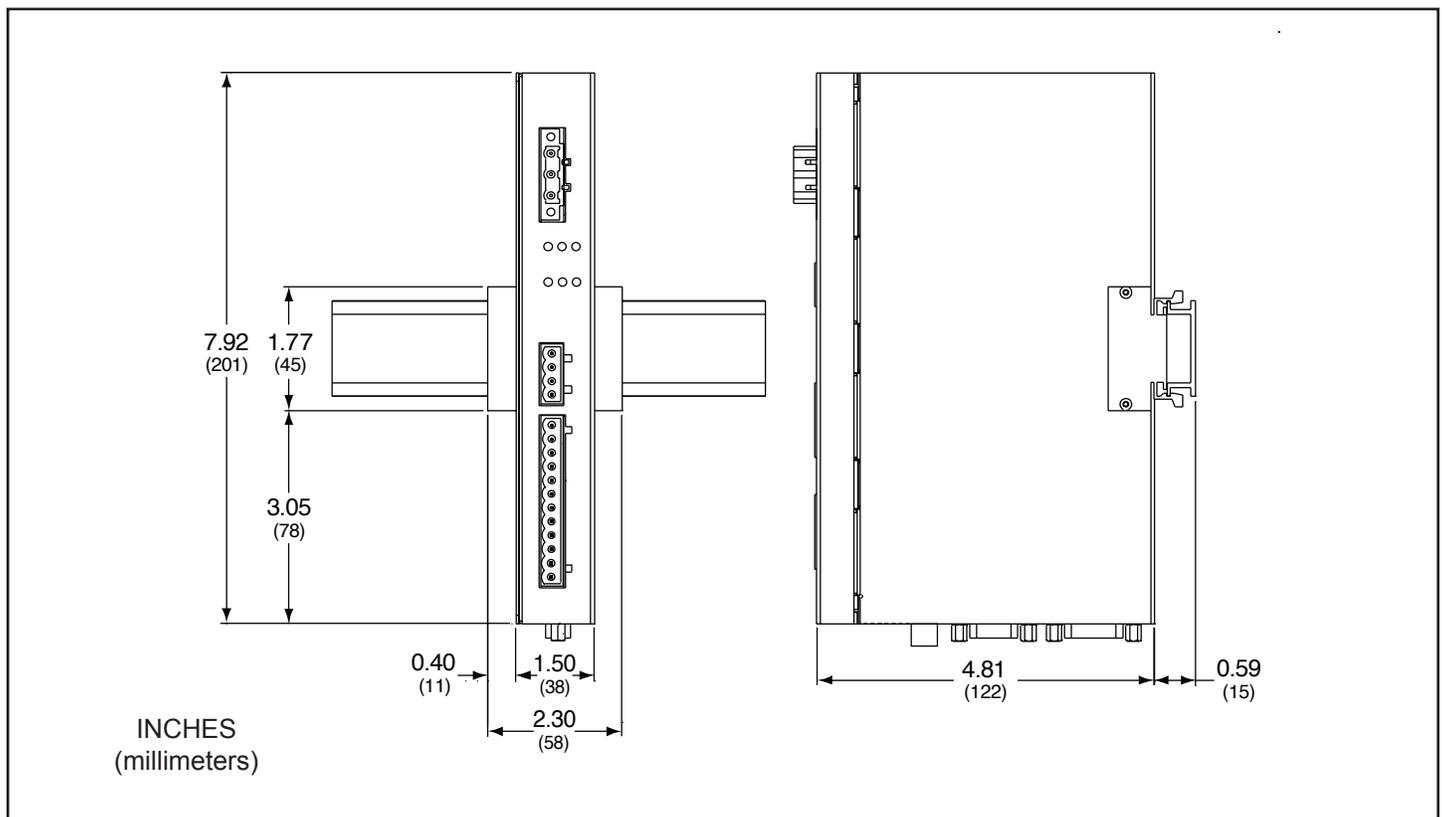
STR-100 front and side views of DIN-rail mounting, with dimensions
